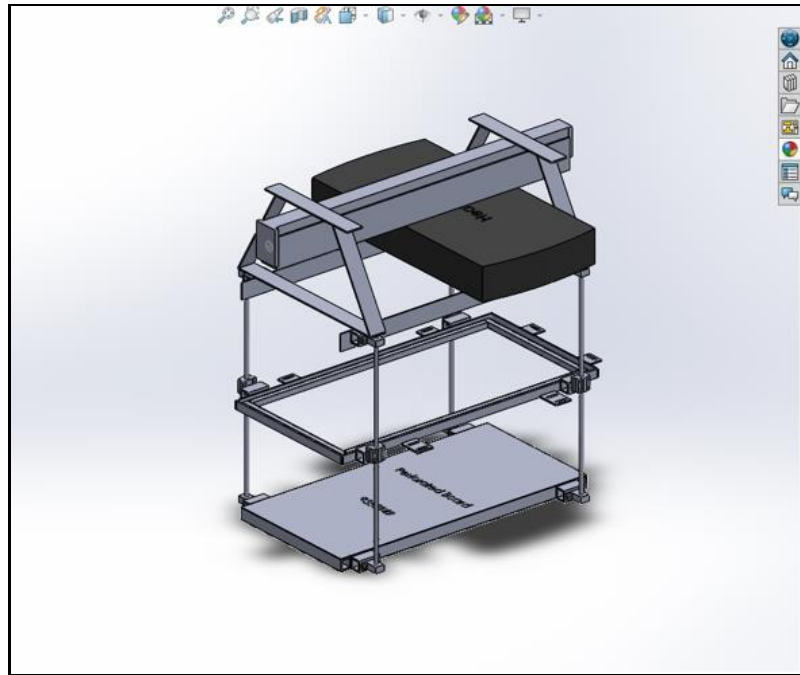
First "A-Frame" SOLIDWORKS Assembly Model
